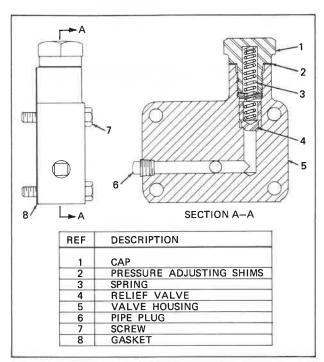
OIL RELIEF VALVE ASSEMBLY.
